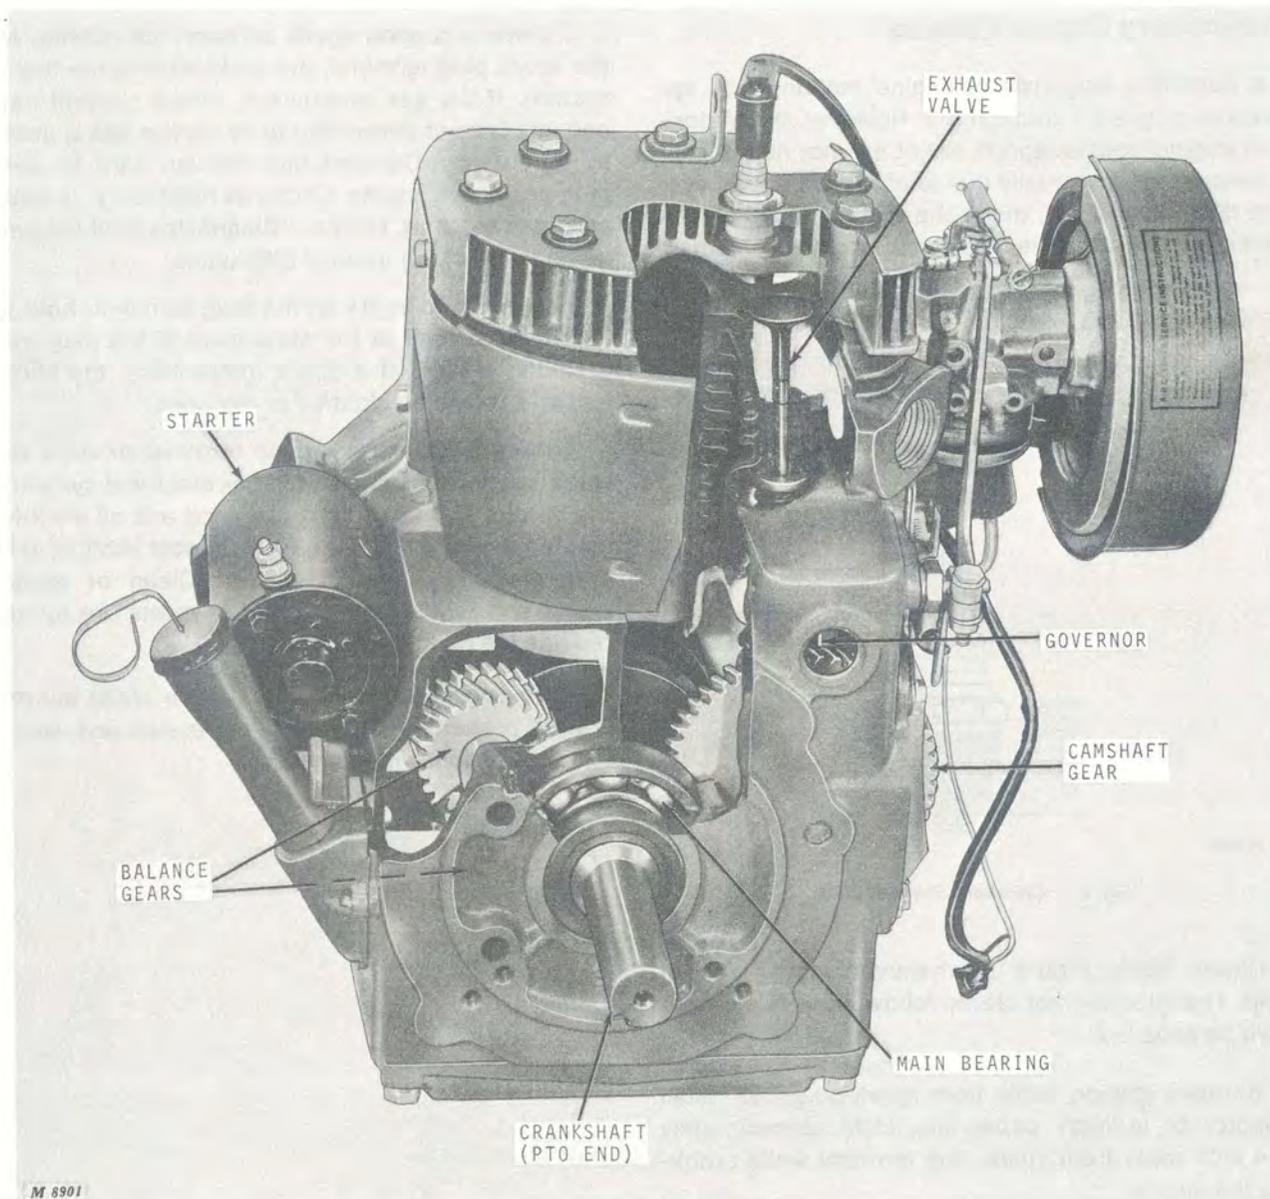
Cutaway View of Kohler K321AS Engine (PTO Shaft End)
